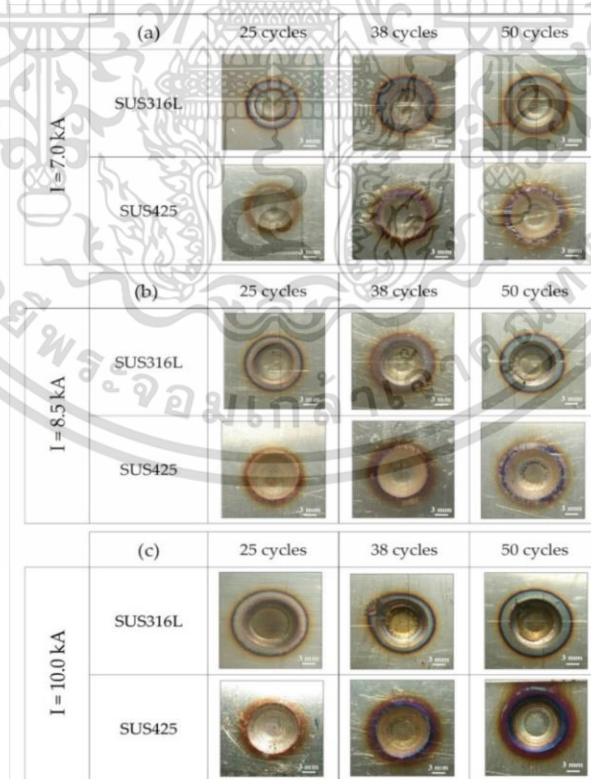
Visual appearances of SUS316L/SUS425 lap joints under 25-, 38-, 50-cycle welding times: (a) 7.0; (b) 8.5; (c) 10.0 kA weld currents.
